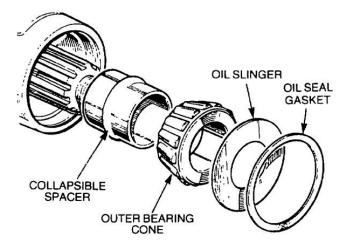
Installation of the Collapsible Spacer and Outer Bearing
